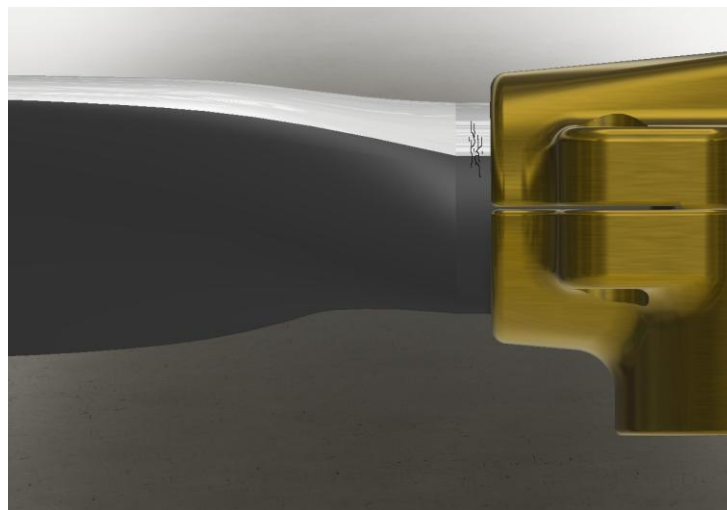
Side View of Jabiru propeller blade with shank paint cracks
